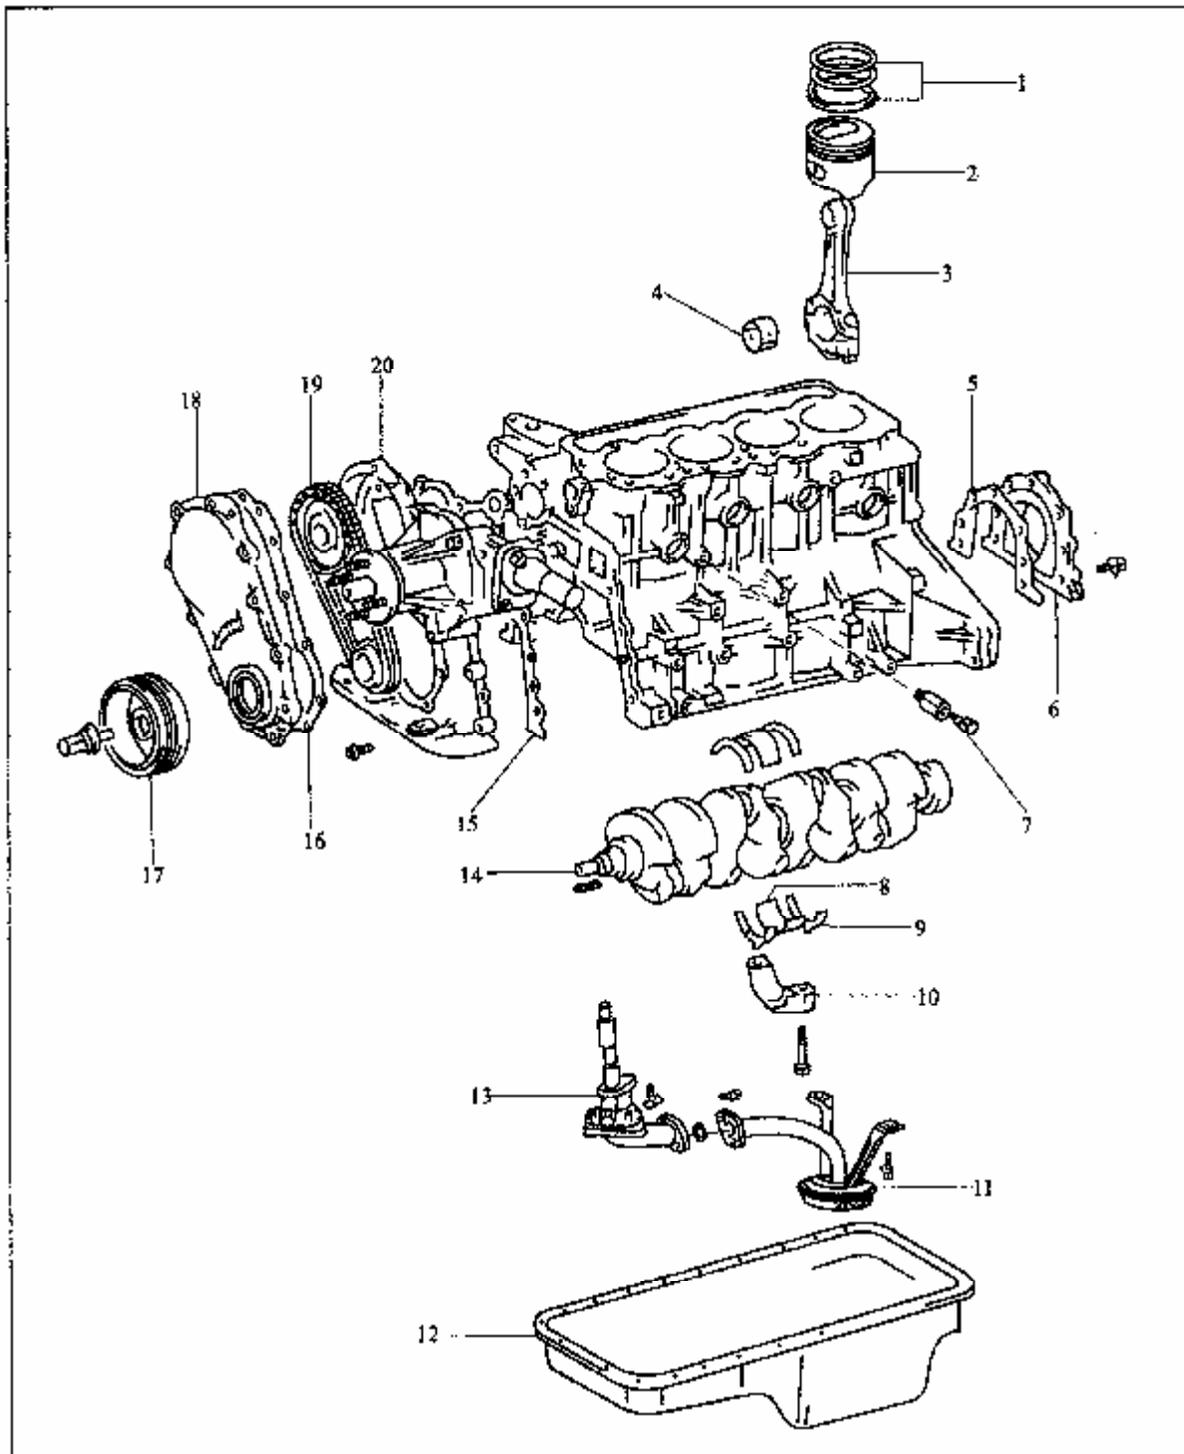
Cylinder Block Parts and Crank-connecting Rod Mechanism Parts -- BJ491EQ1 Multi Point Electronic Fuel Injection Gasoline Engine
